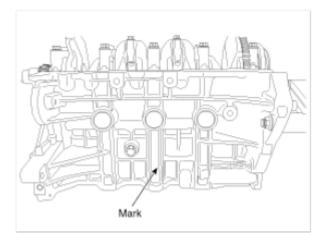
Cylinder Block Crankshaft Journal Bore Mark Location Courtesy of HYUNDAI MOTOR AMERICA
